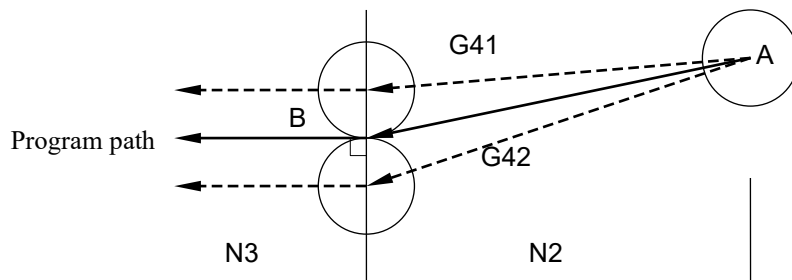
Start of Tool-tip Radius Compensation - 1
